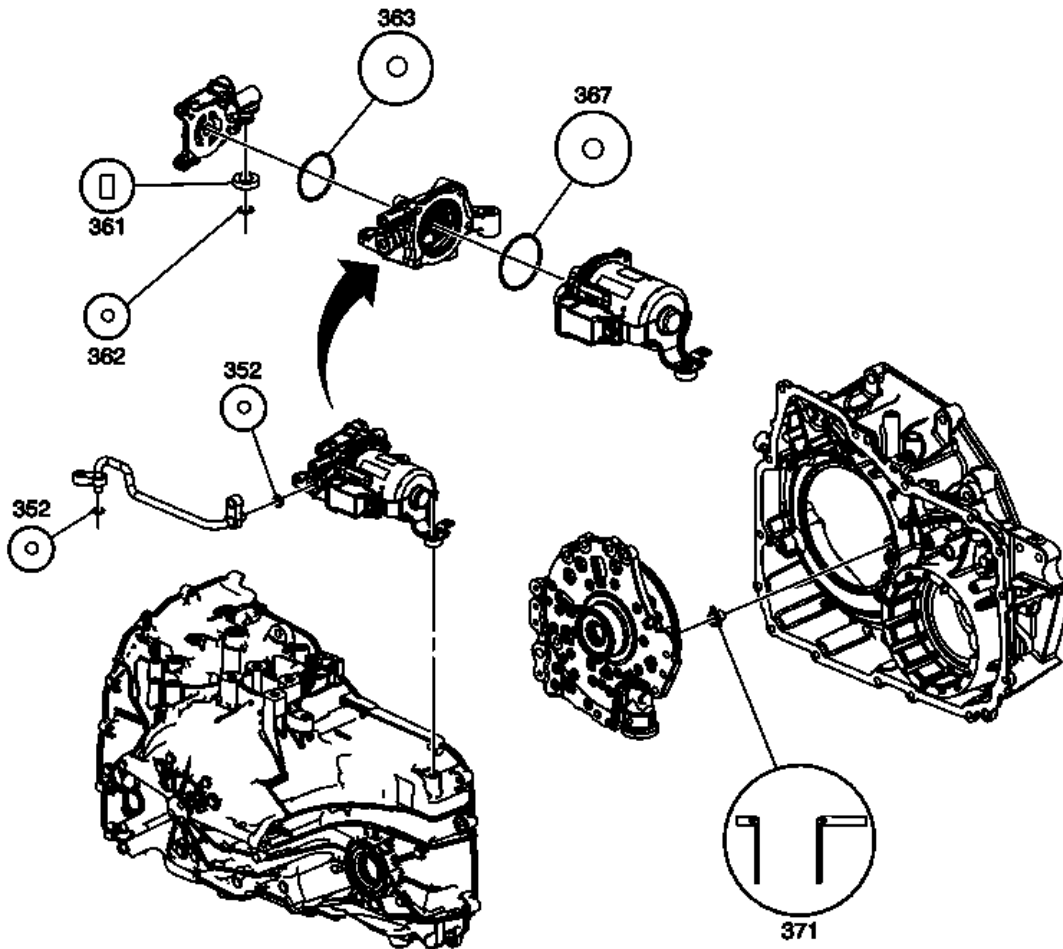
Auxiliary Fluid Pump and Hybrid Seals -- Hybrid Models
